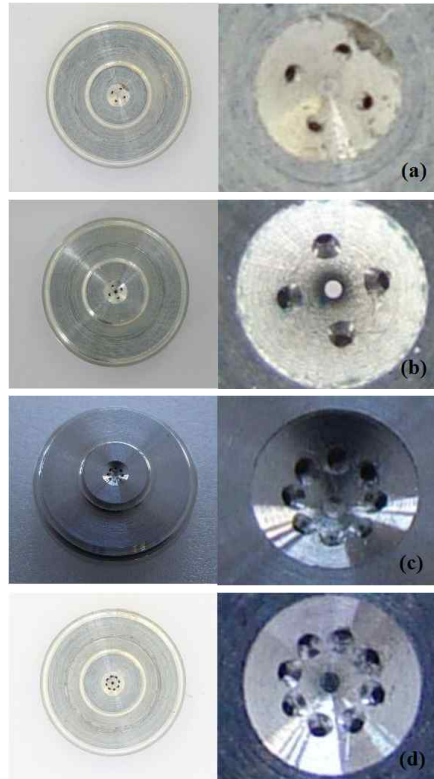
The new designed injector (a) 4 holes, (b) 5 holes, (c) 8 holes, (d) 9 holes
